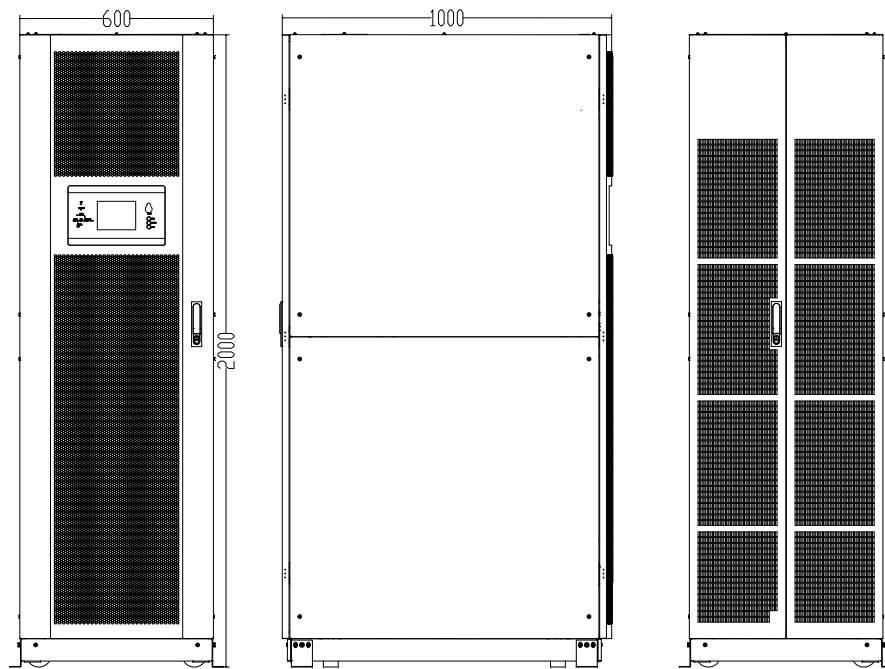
8: 60KVA Built-in Battery UPS Module System External Dimensions
